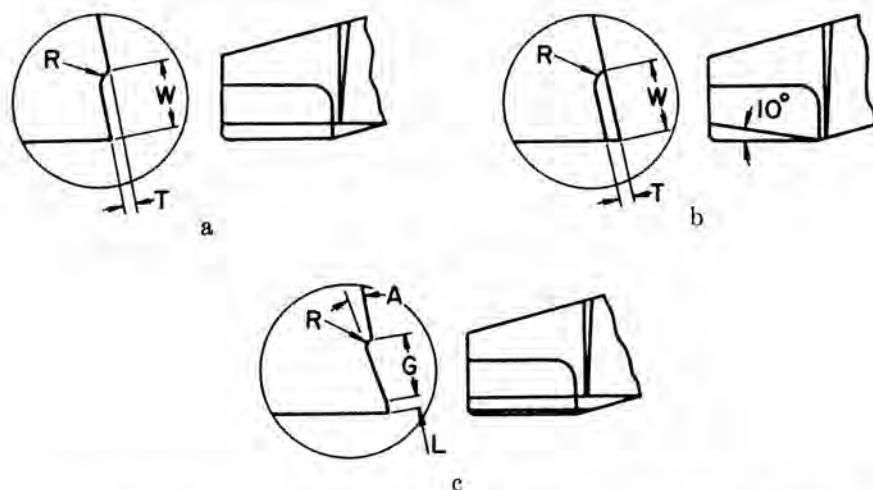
Basic types of chip breakers: a. Parallel, b. Angular, c. Groove type.
